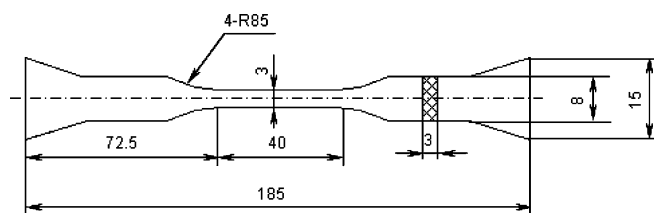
Drawing of as-prepared C/SiC specimen (all dimensions in mm).
